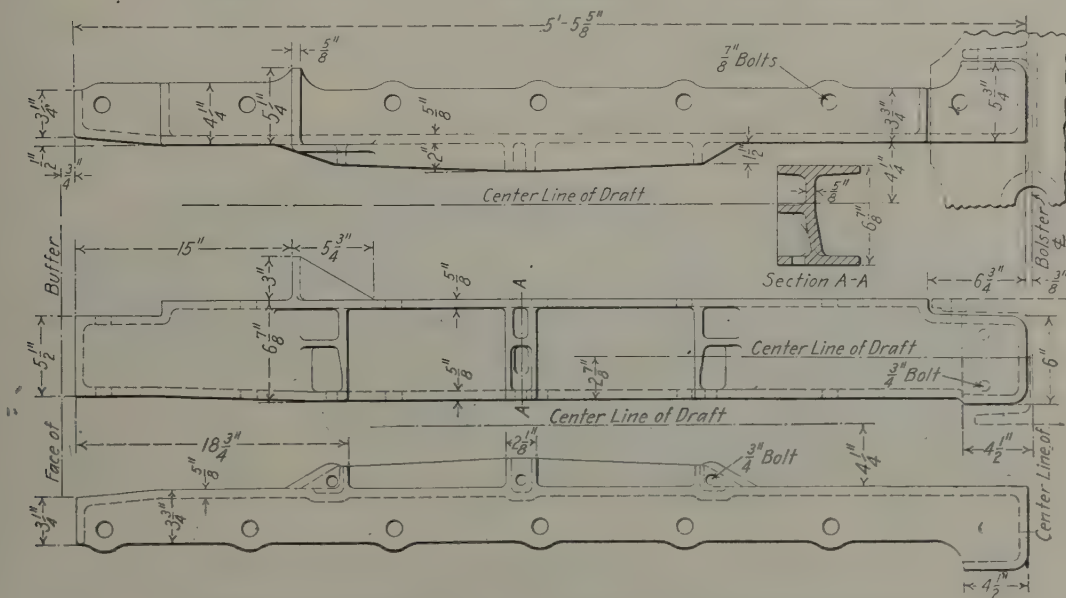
Cast Steel Draft Arm. Pittsburgh Steel Foundry Company.
